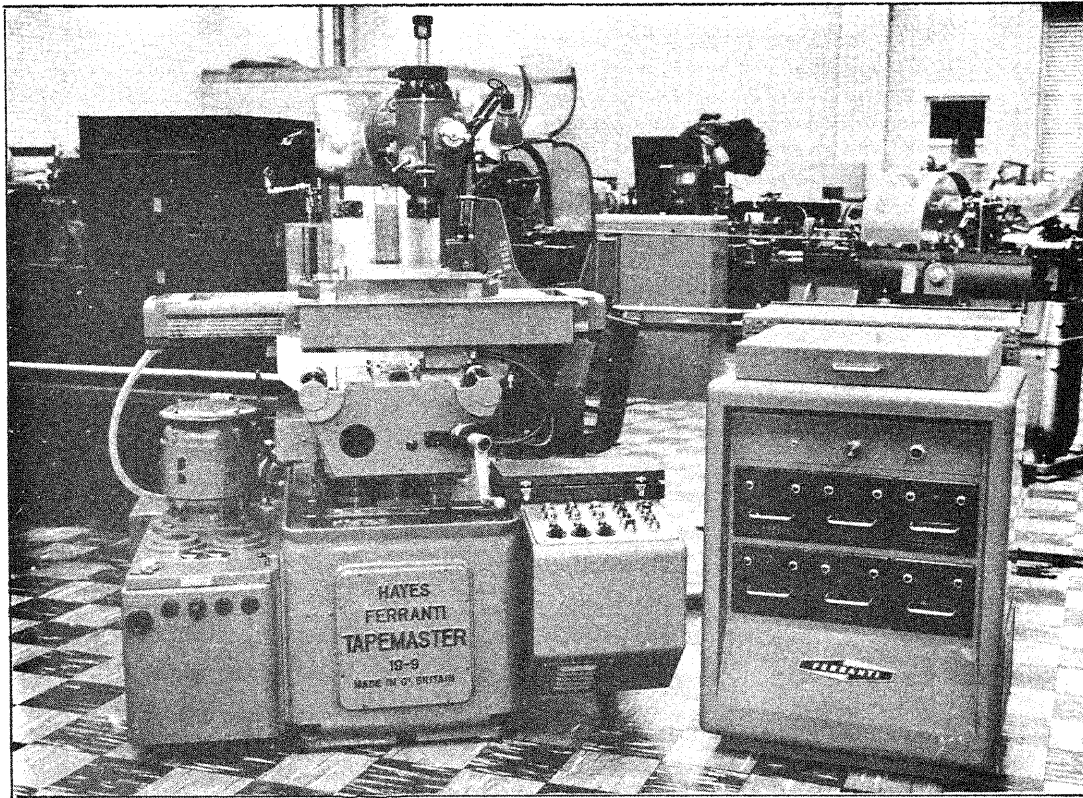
(b) HAYES-FERRANTI NUMERICALLY CONTROLLED MILLING MACHINE
